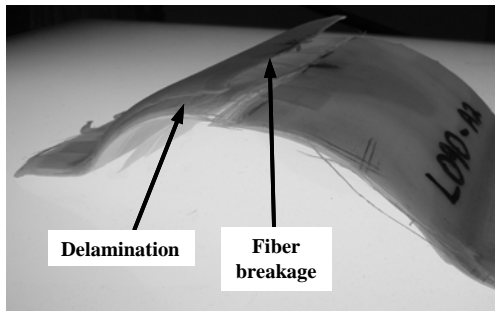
Side view of damaged bolted $[0/90]_{3s}$ large arch composite.
